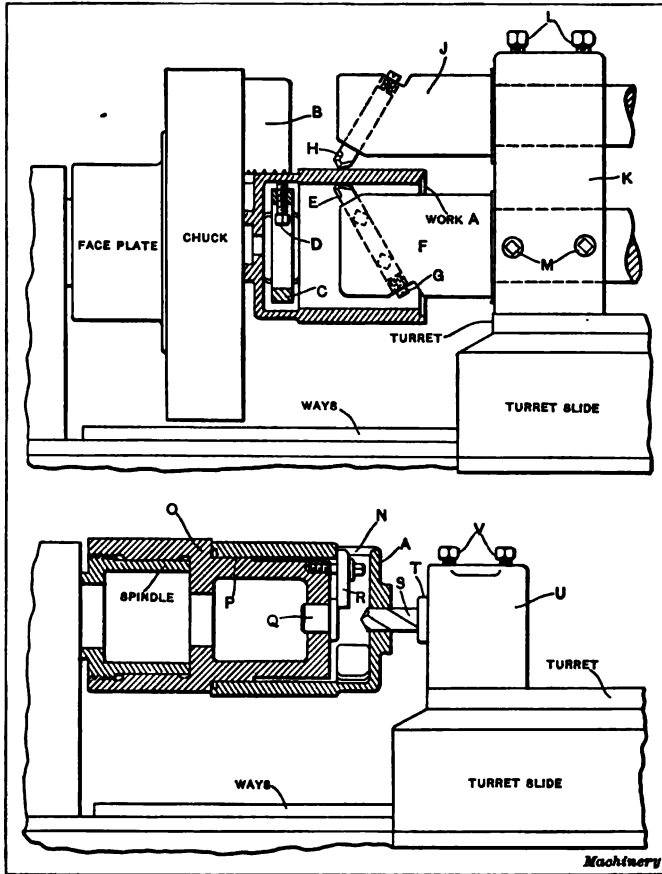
Steel Casting of Fragile Construction Machined on Turntable Lathe
